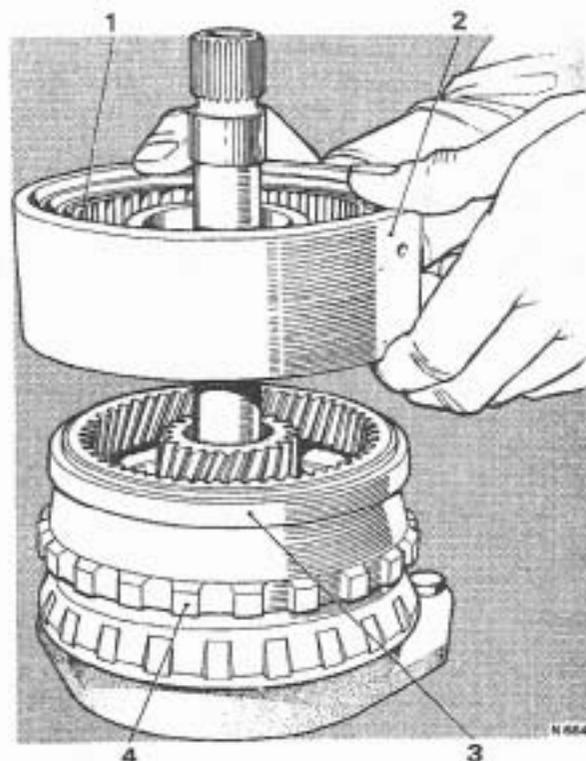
REMOVING THE REACTION CARRIER AND REAR SPRAG ASSEMBLY
